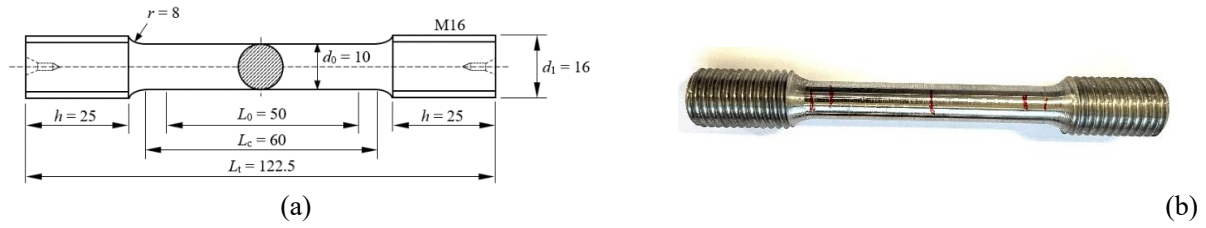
Test specimen for bolt material properties: (a) dimensions; (b) photo
